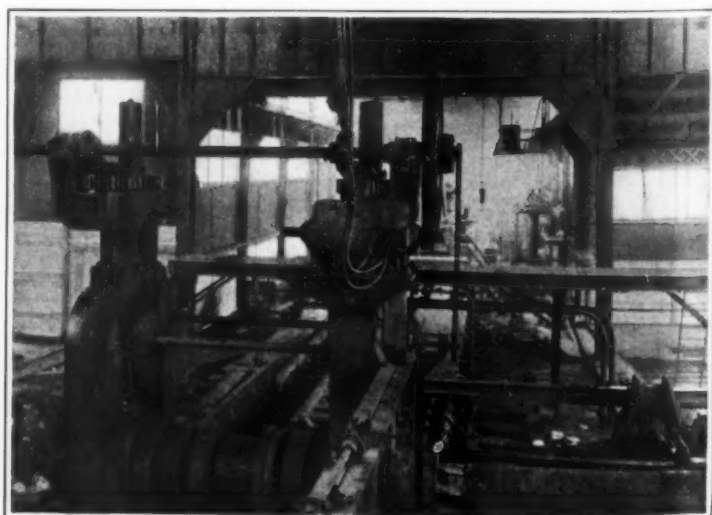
Electric Motor Equipment on the Mill Frame for Handling the Rolls.
